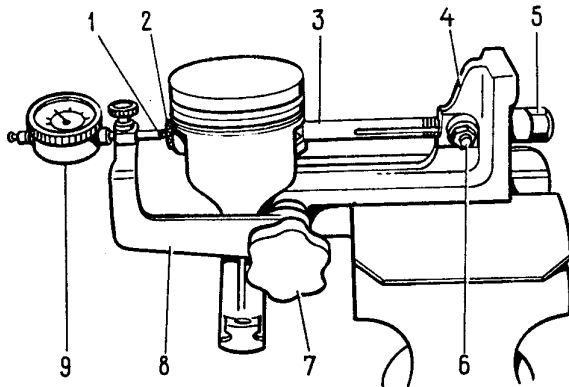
Assembled Piston-Pin-Connecting Rod Group Installed on Tester A.95615 for Pin Pressing-Out Test:
